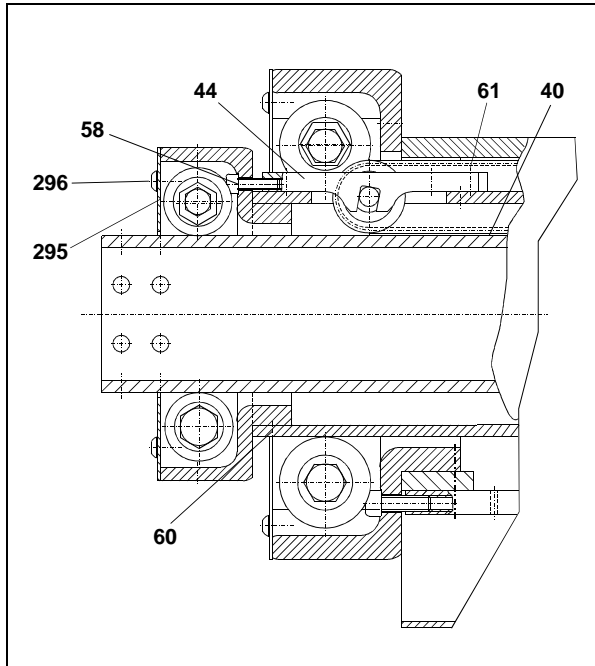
Remove drive housing (Pos. Nos. for HTR80)
